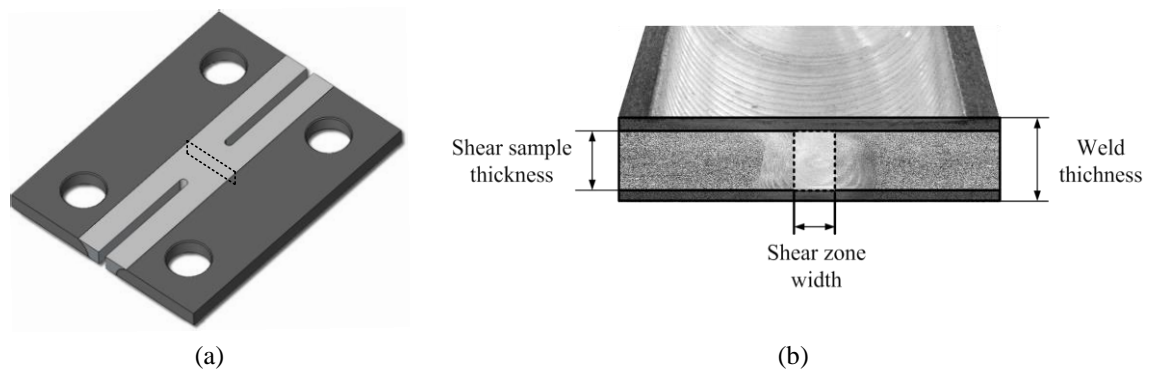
Weld shear test sample scheme (a) and cross-section (b).
